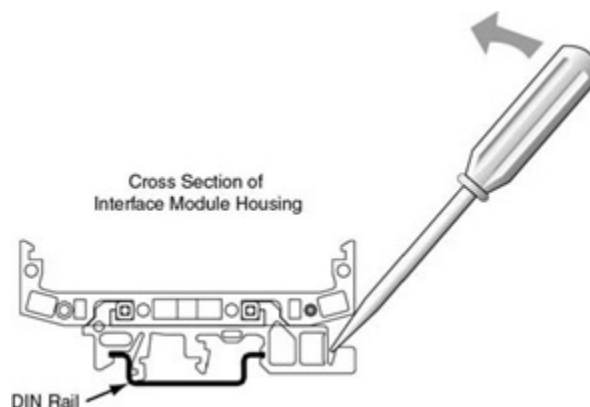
Removing the Compressor I/O Board from the DIN Rail
